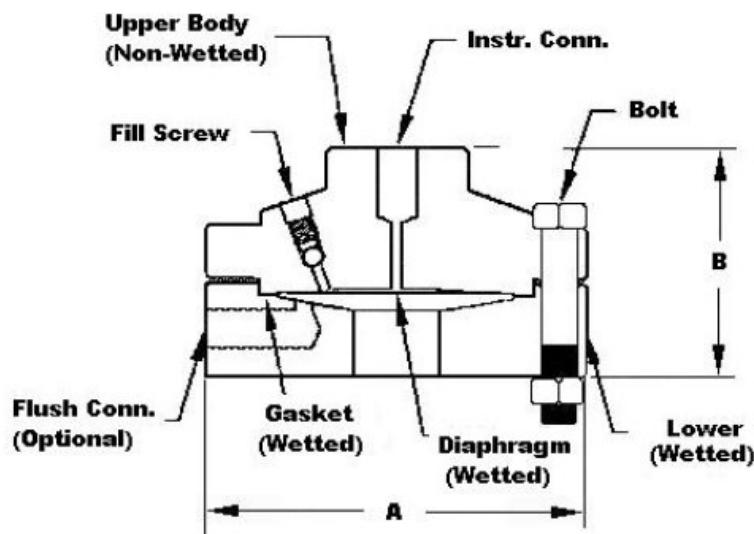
Seal Dimensions (Threaded Process Connection Seals)
